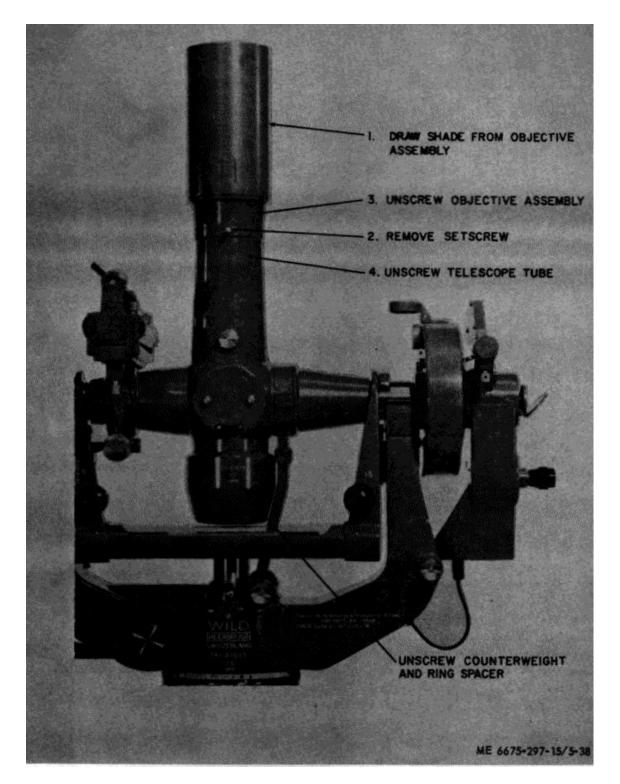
Telescope shade, tube, objective assembly, counterweight, and ring spacer; removal and installation.
